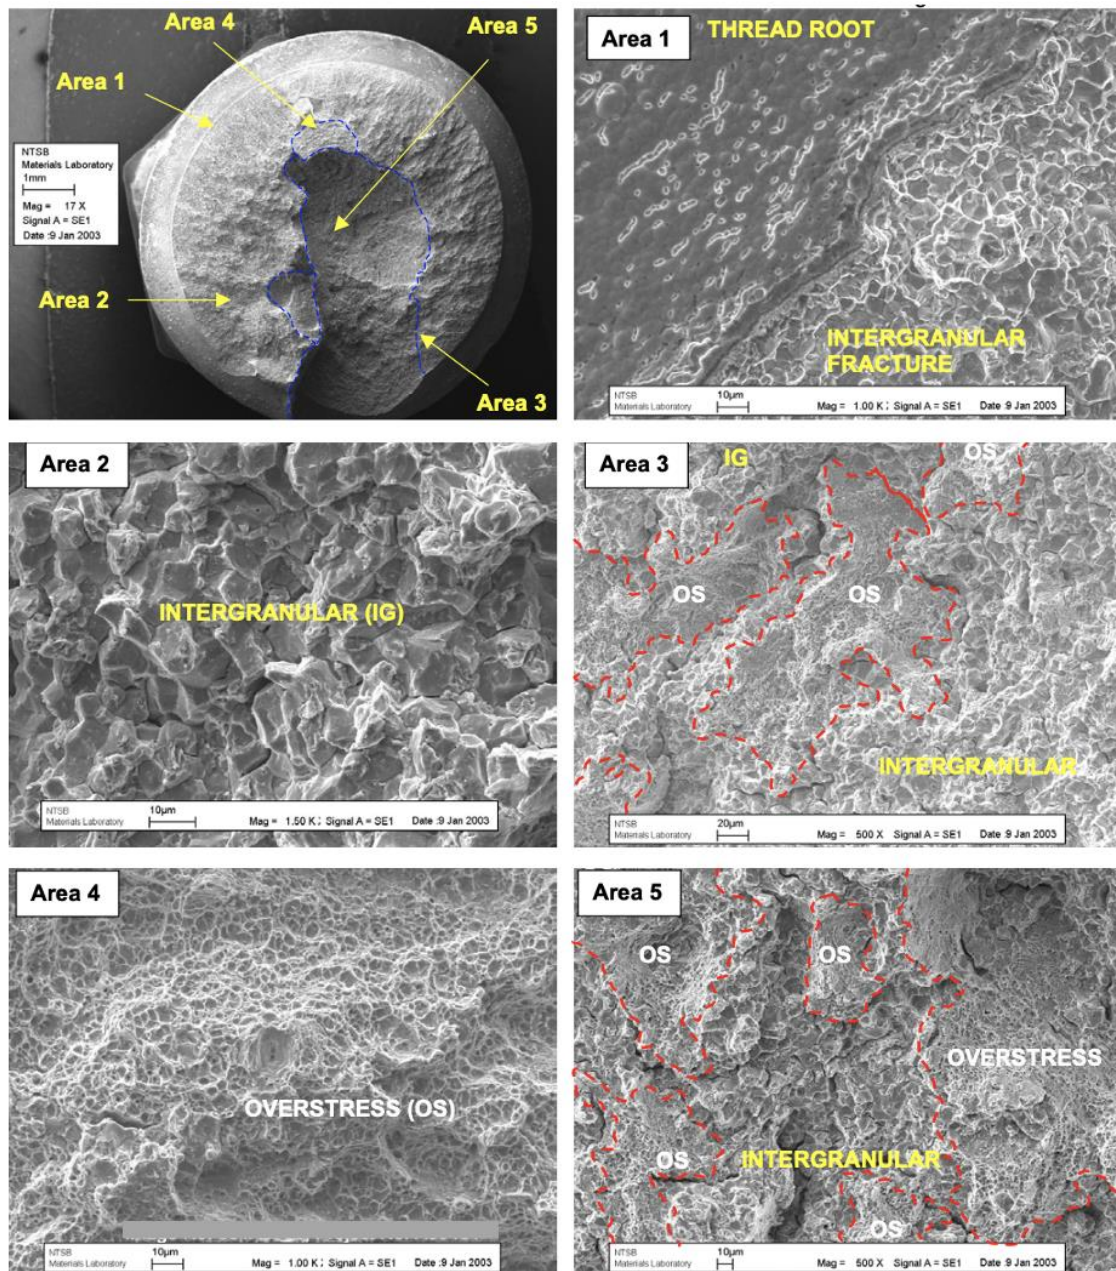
SEM image showing intergranular cracking along the fracture surface of the crankshaft bolt, indicating hydrogen-assisted cracking [212].
